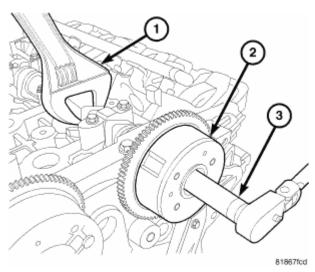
CAMSHAFT PHASER Courtesy of CHRYSLER LLC
